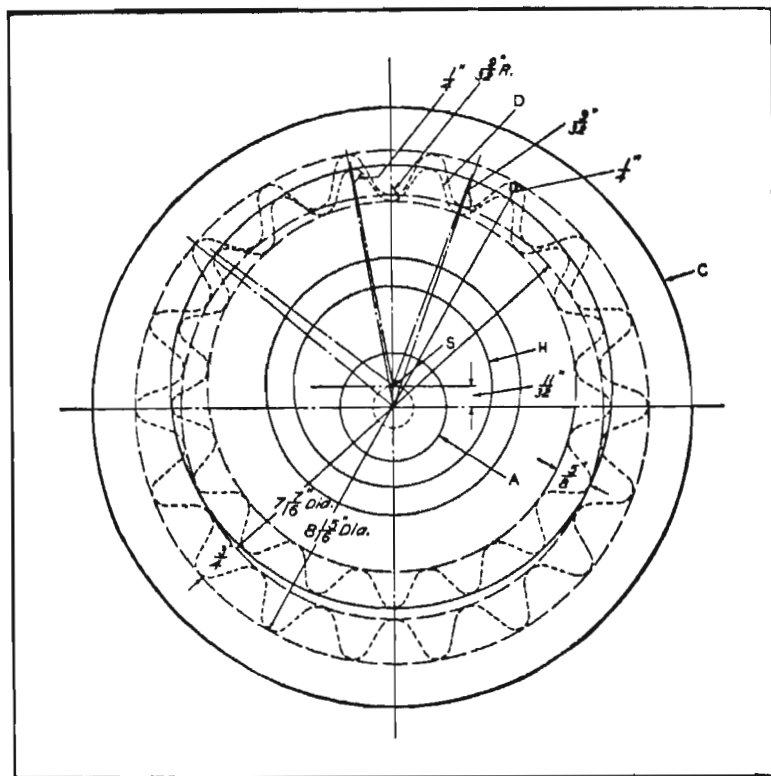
Wobble-gear and Eccentrically Mounted Pinion of 18-to-1 Ratio Speed-reduction Mechanism
